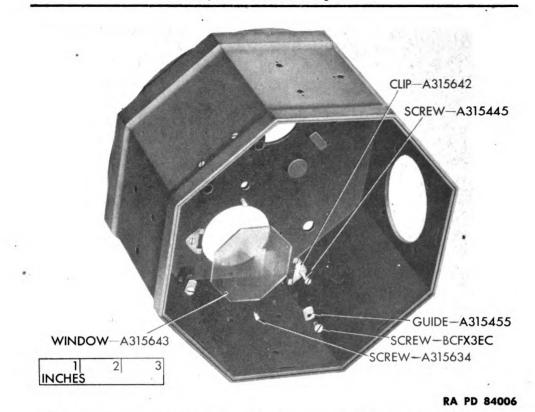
Target Housing Showing Removal of Target Window and Target Gear Disk Guide
